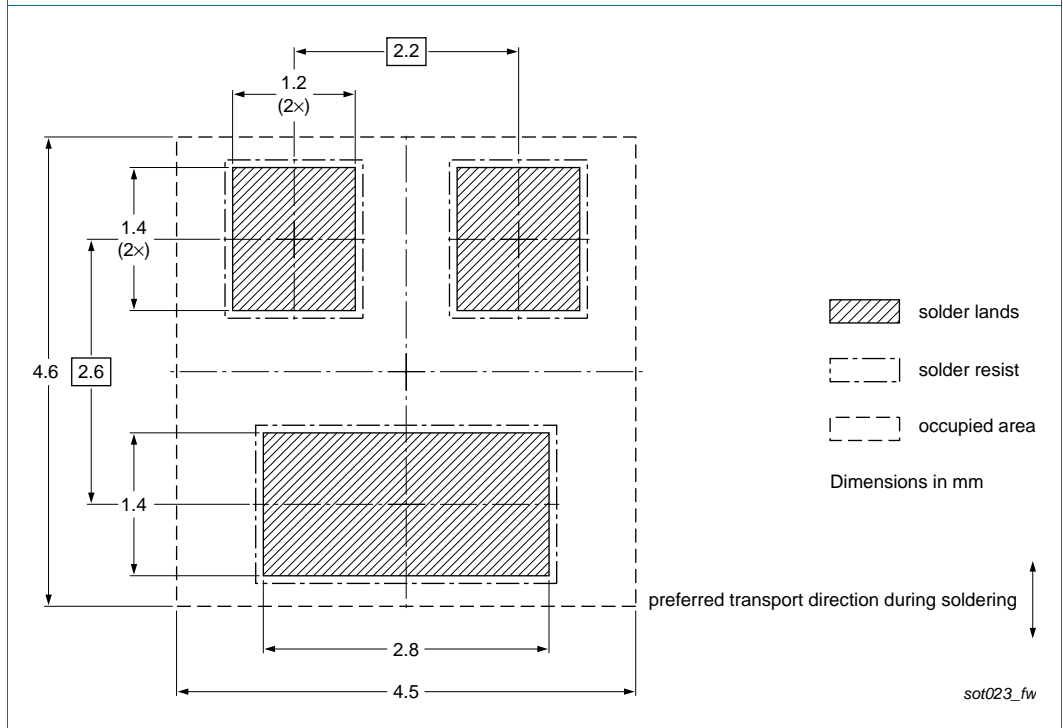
Wave soldering footprint PDTD1xxxT series (SOT23/TO-236AB)
